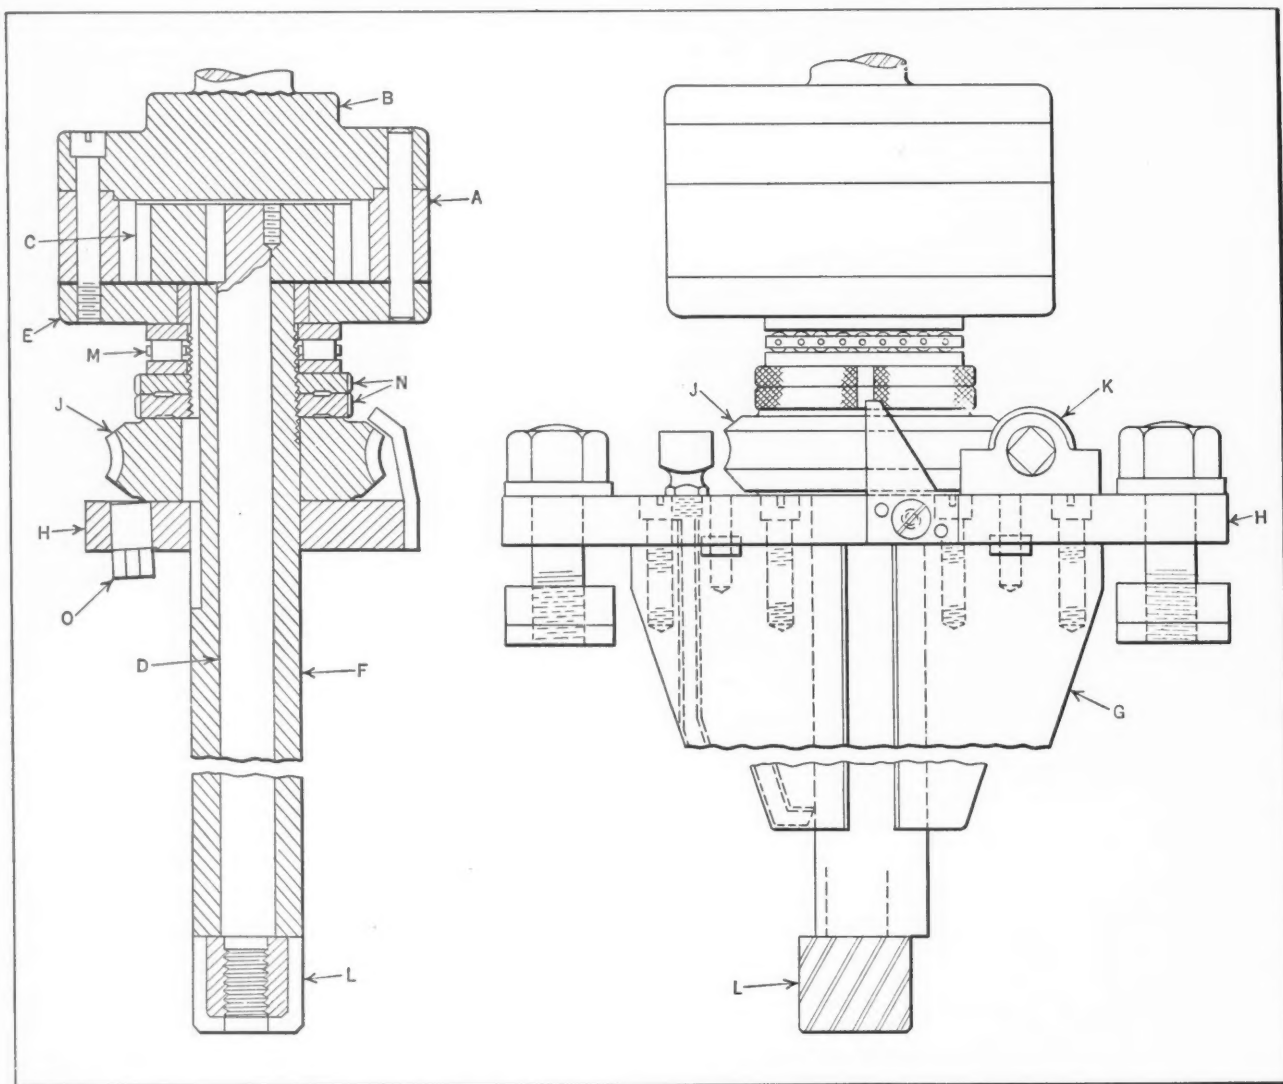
Recessing Tool with Planetary Feed for Milling an Irregular Recess at a Depth of 8 1/2 Inches
